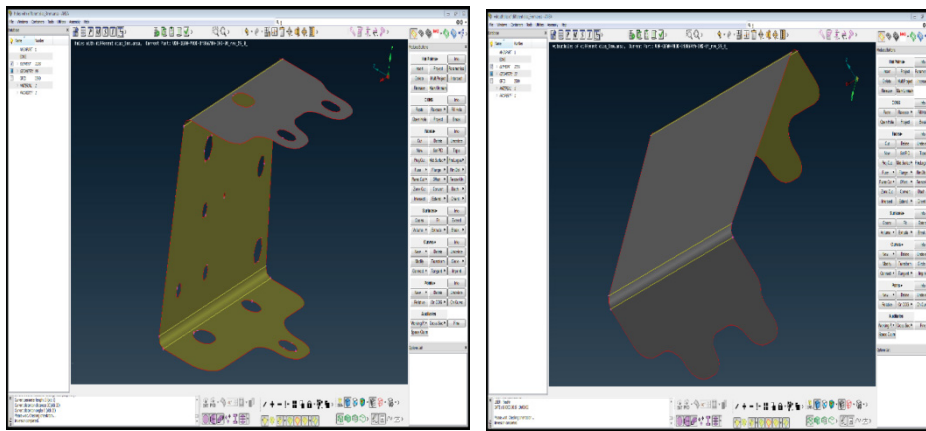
19. CAD geometries with holes of different diameters and smooth surface respectively.
